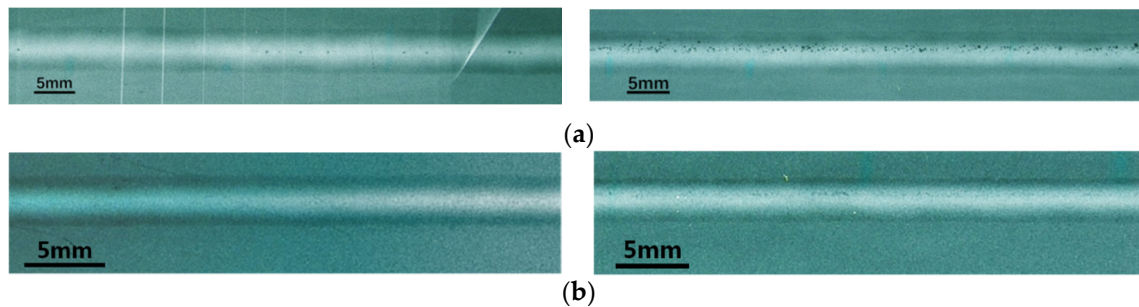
X-ray radiographs of butt welds made under flat and horizontal welding positions with two different sets of welding parameters. (a) Flat welding (left) versus horizontal welding (right) for 2.2 kW and 8 mm/s; (b) Flat welding (left) versus horizontal welding (right) for 2.5 kW and 20 mm/s.
